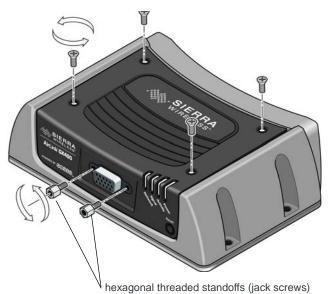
Removing the screws and threaded standoffs (I/O X-Card installed)
